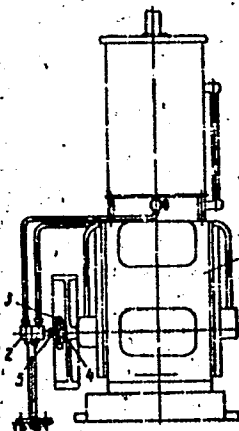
1-- pump; 2- valve; 3- centrifugal governor; 4- pump shaft;
